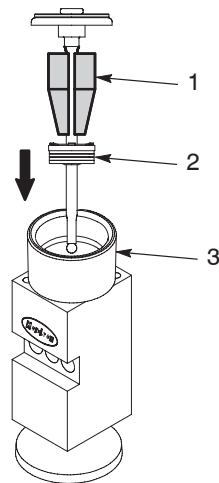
Using the seal tool to install the retaining ring, seal support disk, and hat seals
